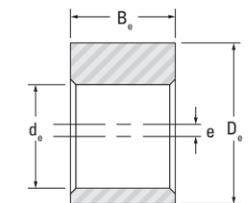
Eccentric bushing dimensions – metric series (except GCR, GCUR series)
